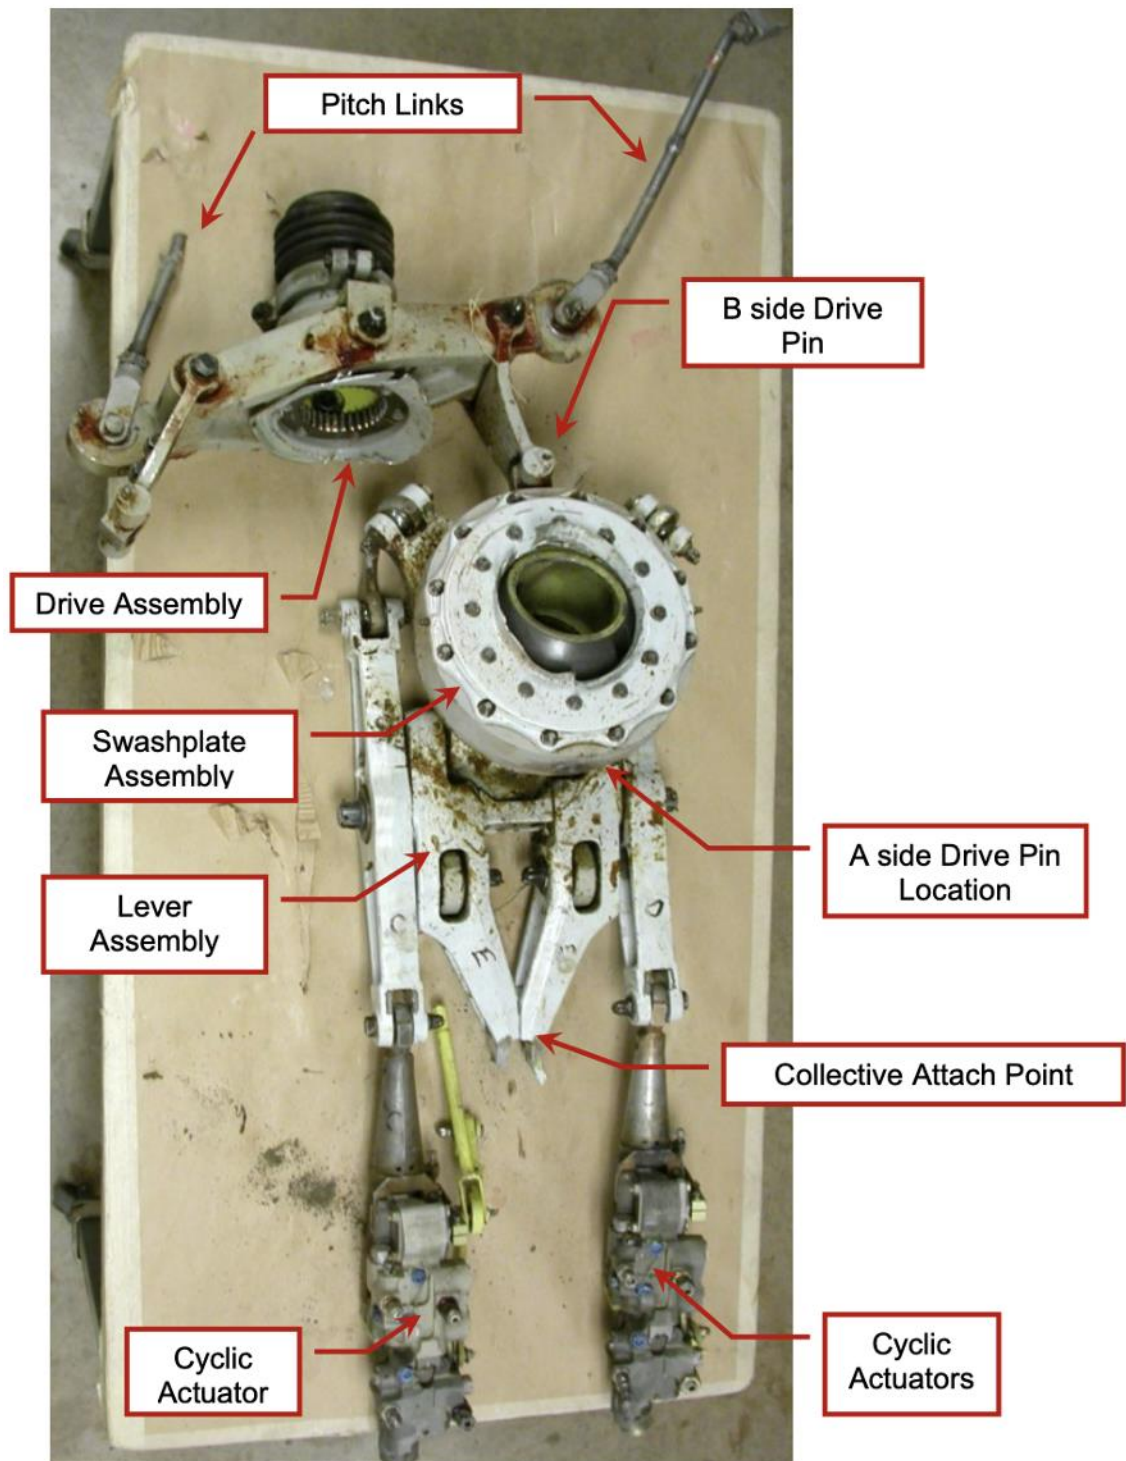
Separated rotor components prior to disassembly, highlighting the critical assemblies (swashplate, drive assembly, and pitch links) [211].
